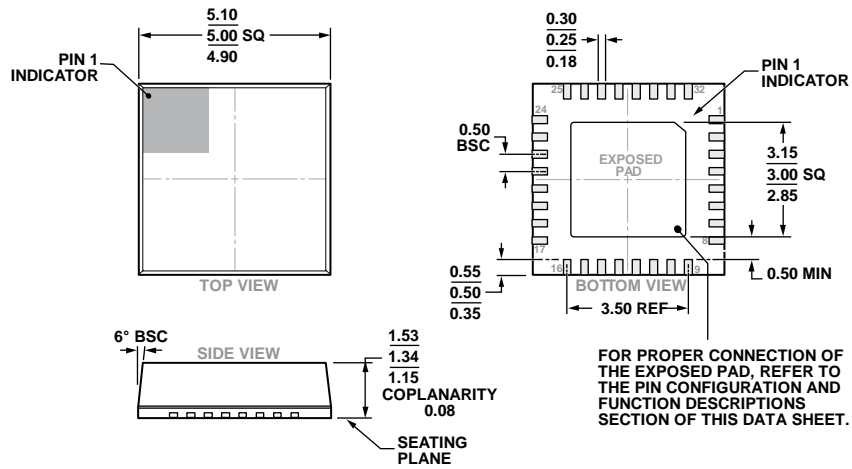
32-Lead Lead Frame Chip Scale Package [LFCSP]
